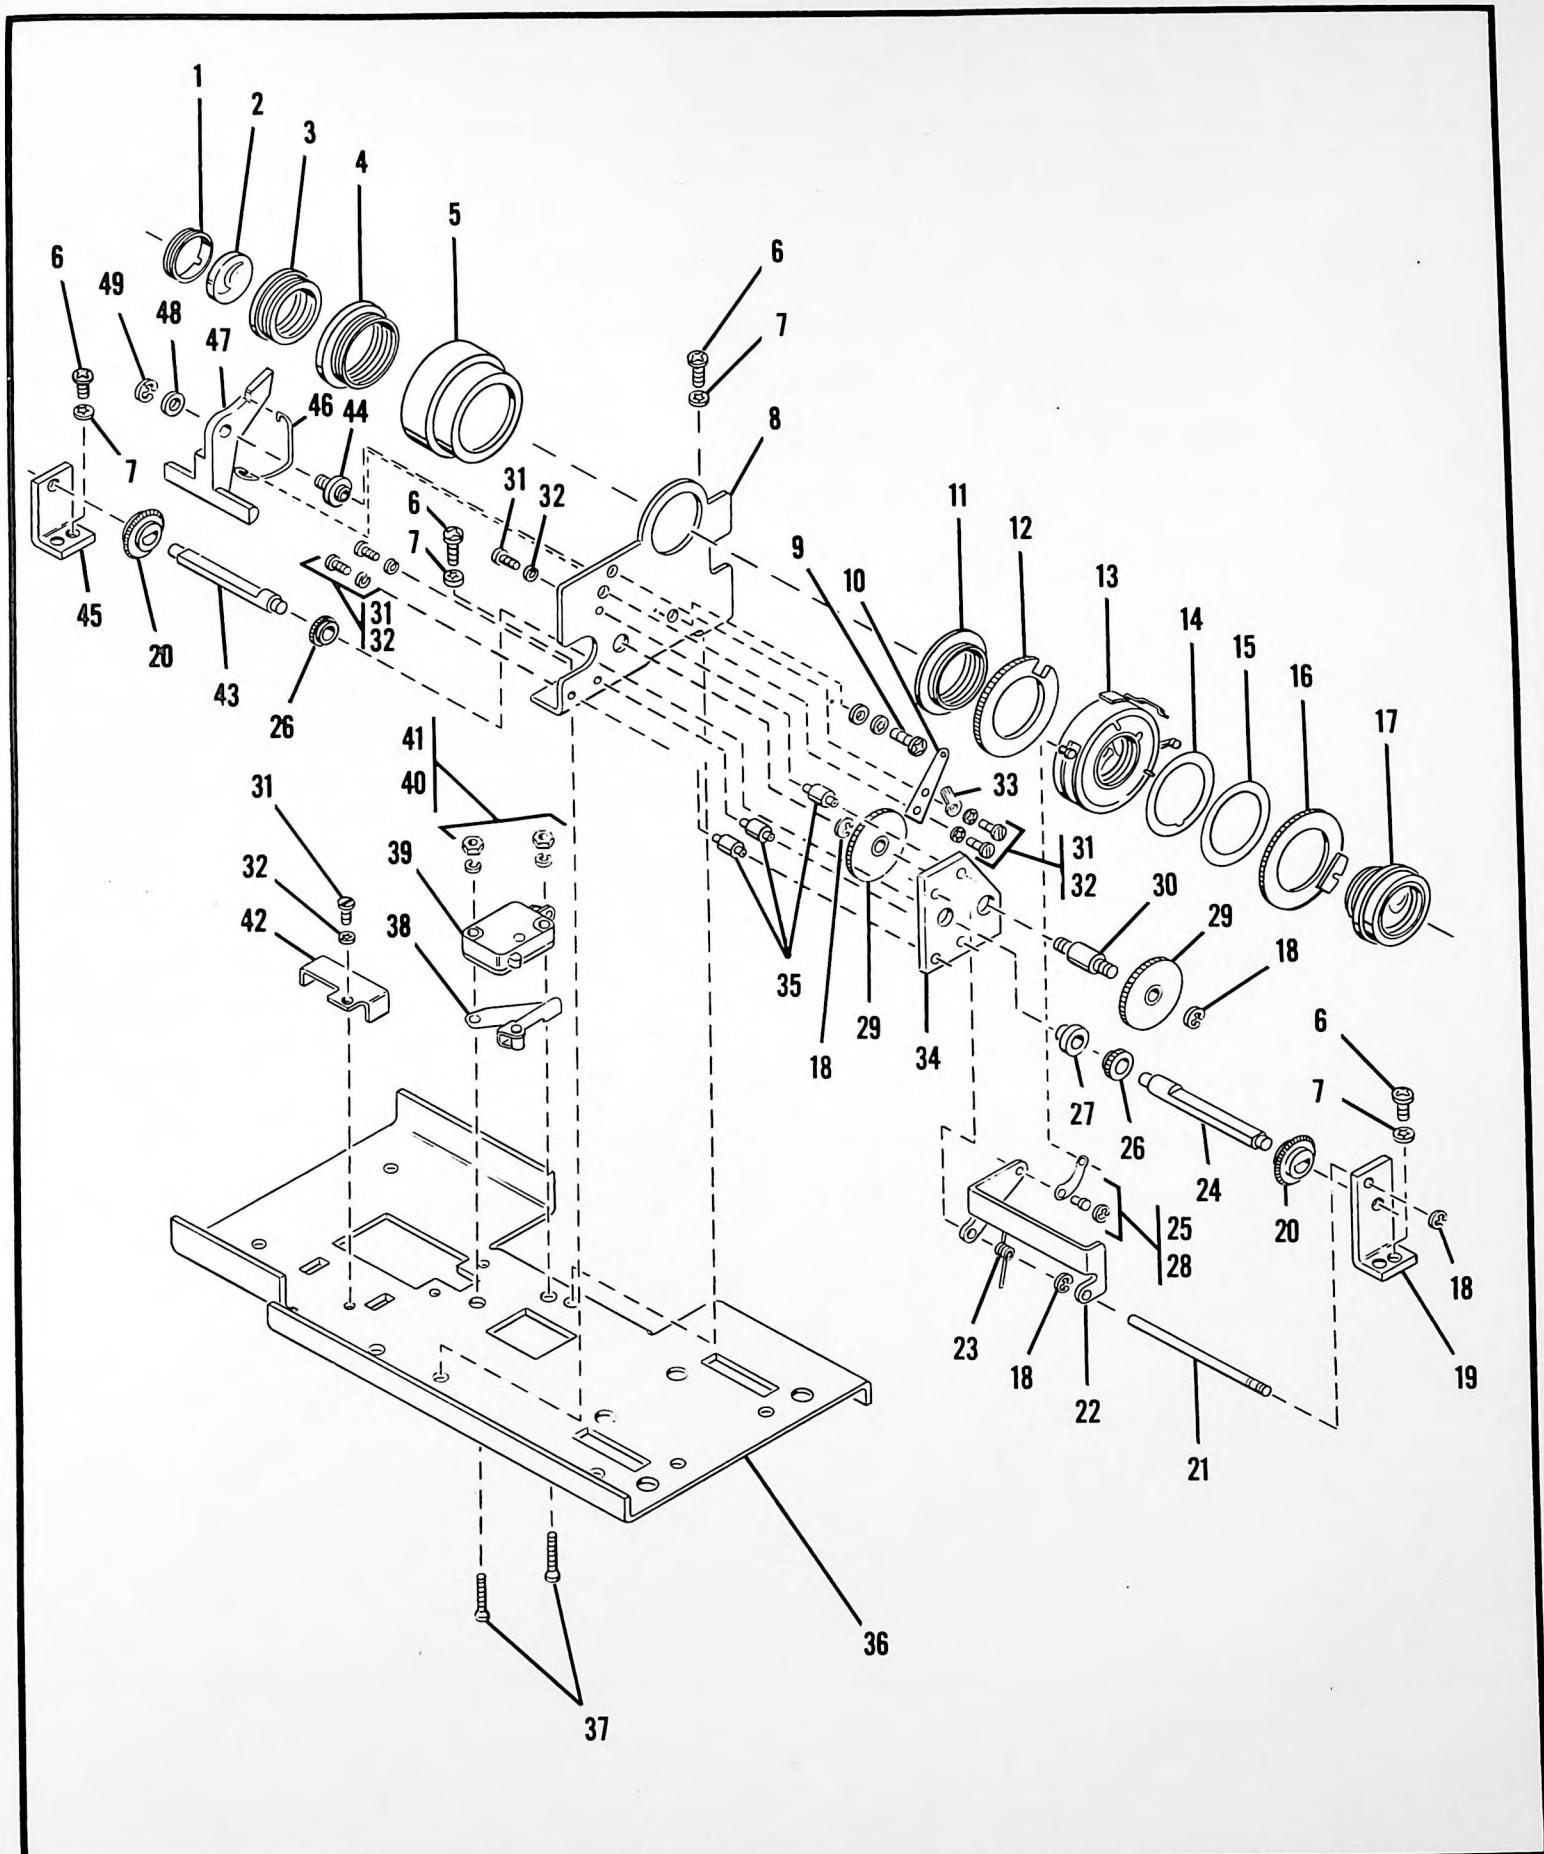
Camera Carriage and Lens and Shutter Assemblies (Sheet 3 of 3)
